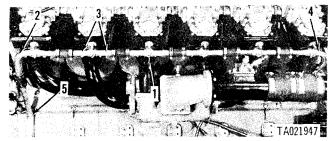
Removing or installing right rear cylinder head oil drain tube and turbosupercharger oil drain tube.
